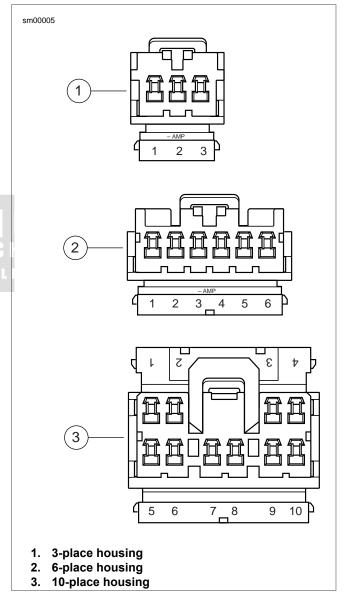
Tyco 070 Multilock Unsealed Connector: Cavity Numbers on Secondary Locks (socket housings shown)
